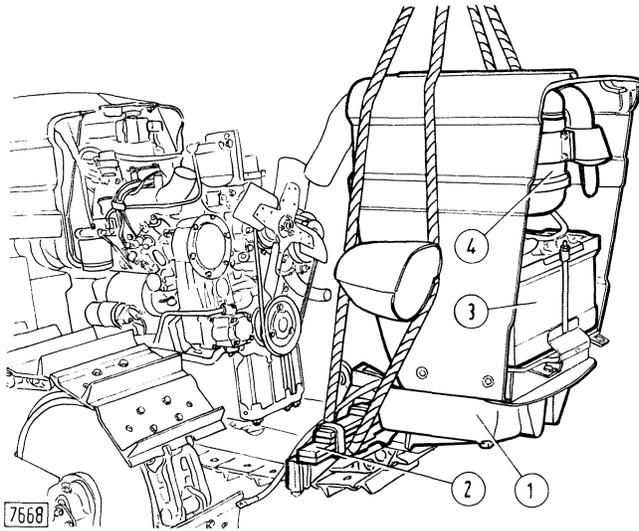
Removing the Front Mounting, Radiator and Front End Panelling (455 C - 505 C)
